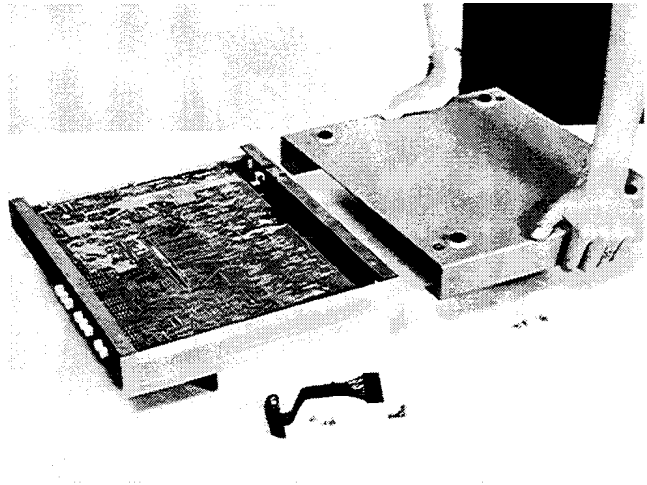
Removal of the bottom shell. The top cover has been temporarily installed as a support.
